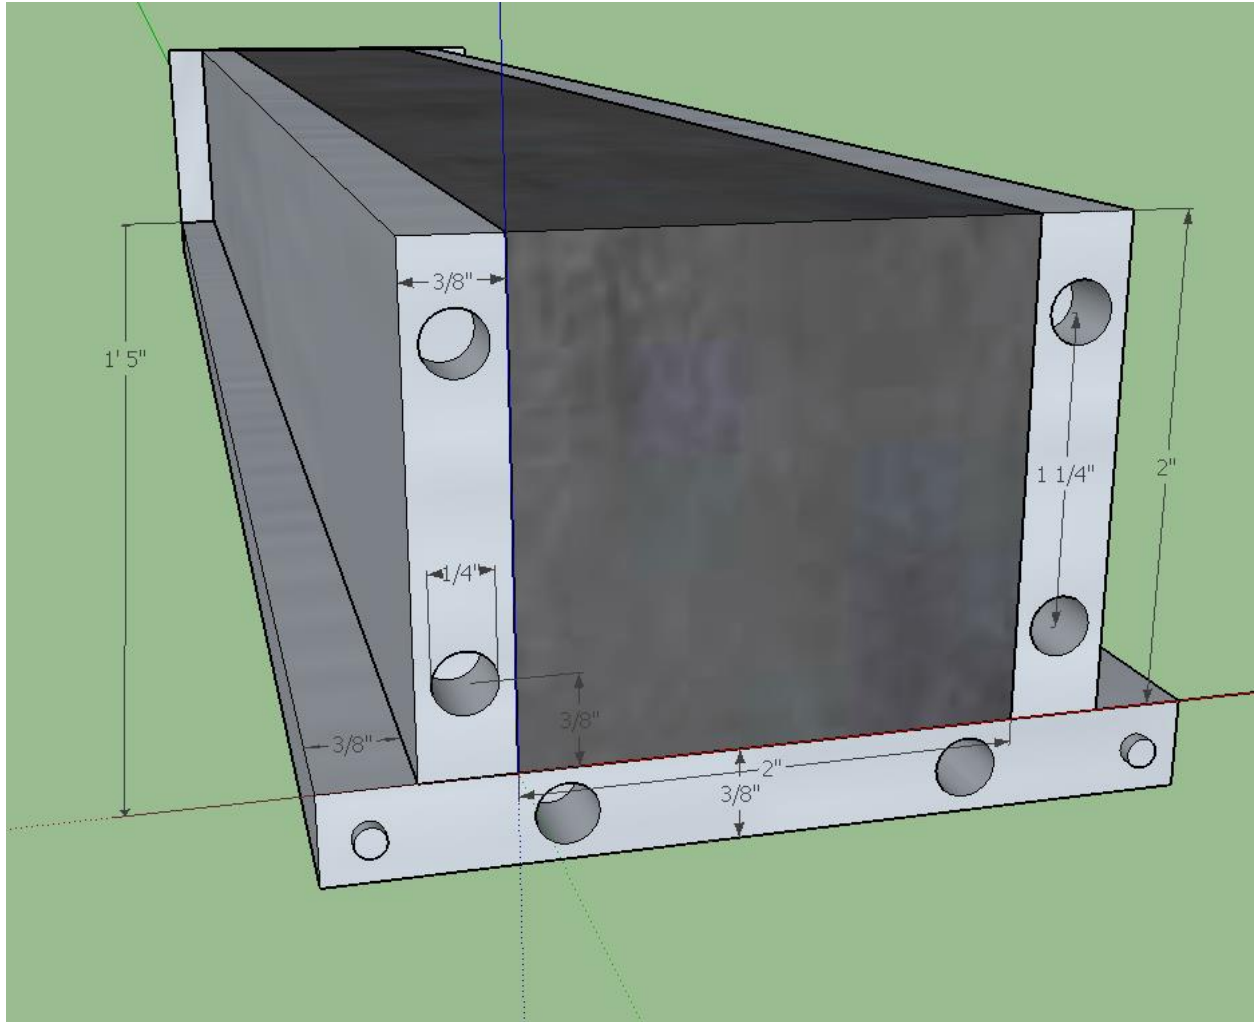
Design drawing of direct tension specimen steel mold with end plate removed to show dimensions
